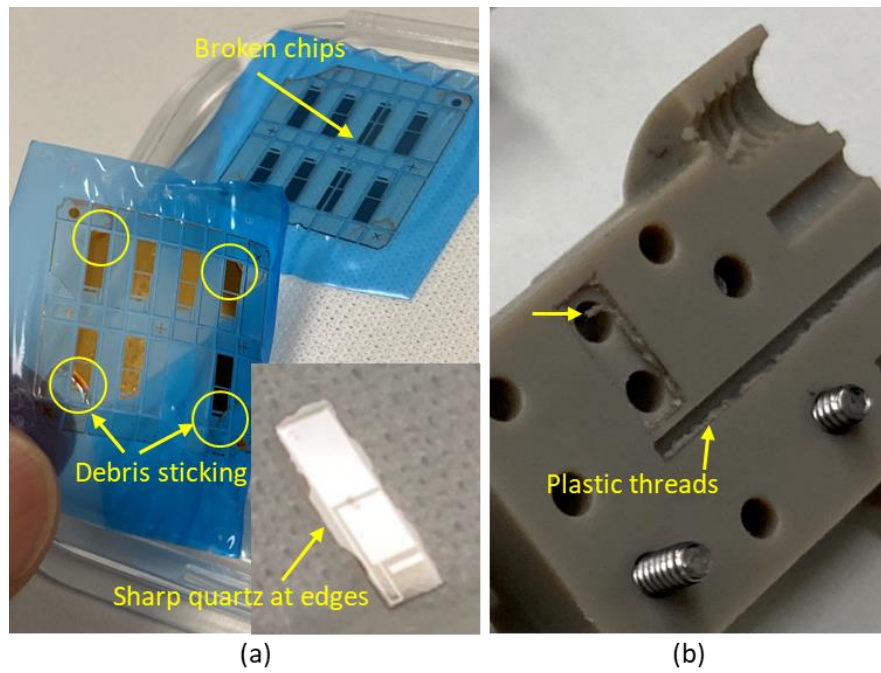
Fabricated (a) sensor chips, (b) sensor A body before plating.
